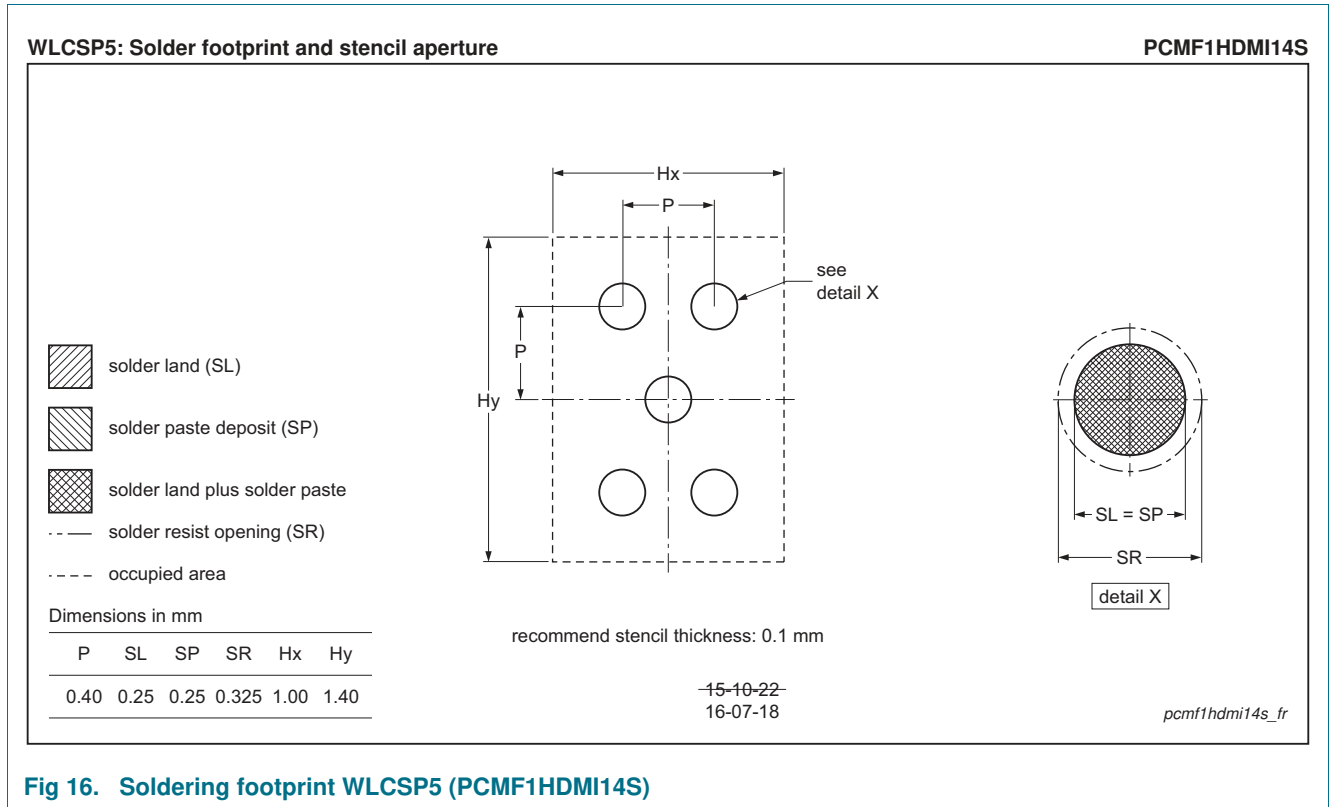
Soldering footprint WLCSP5 (PCMF1HDMI14S)
